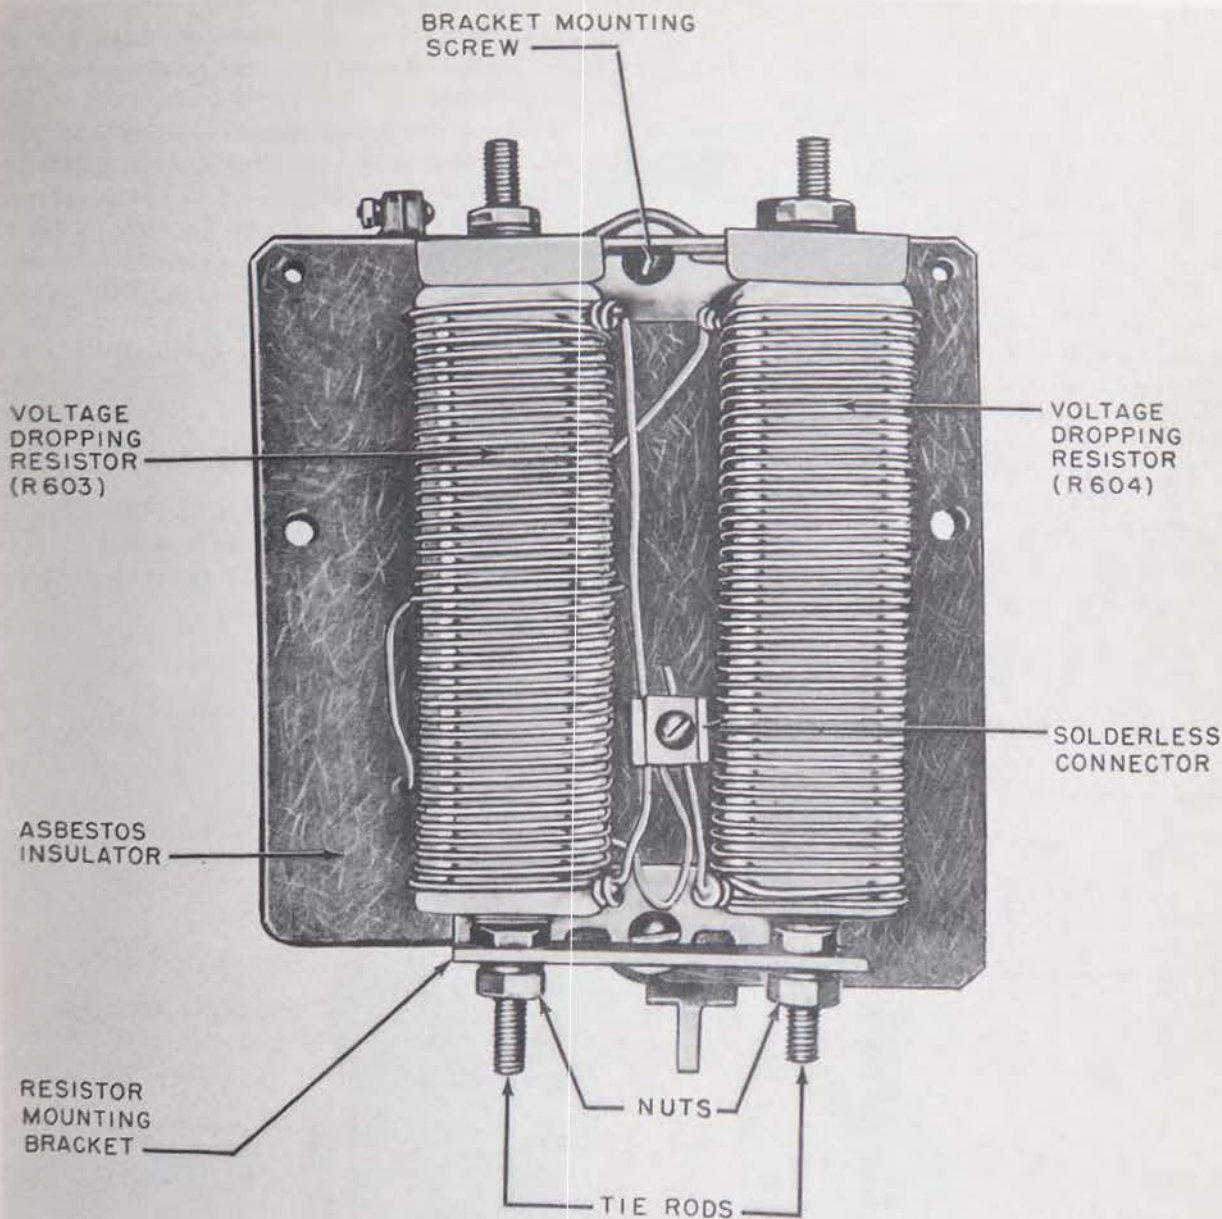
Motor Starter SA-286/SPN-11, rear view.
